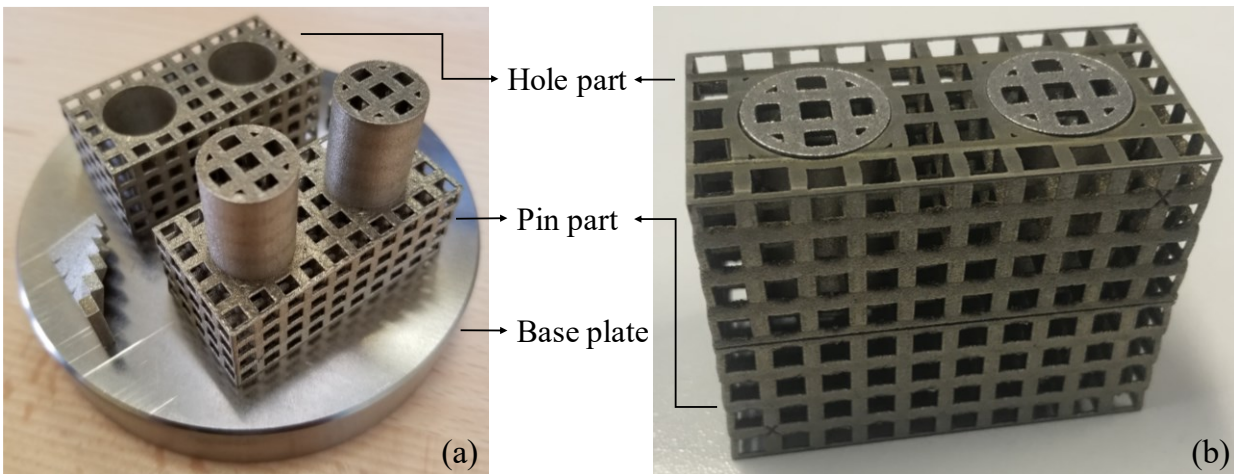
Manufactured ABTA on the build plate (a) and removed from the build plate and (b) assembled as per the specified orientation
